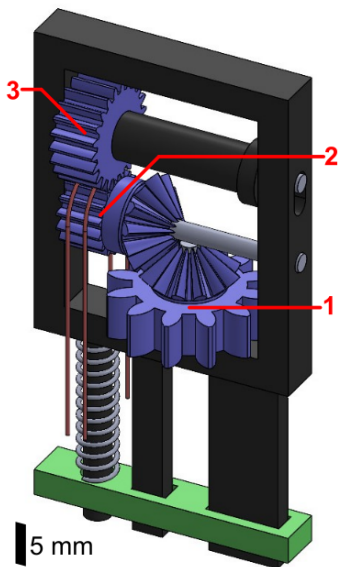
Actuation unit consisting of two bevel-spur gears (1, 2) and one spur gear (3) with tension regulating mechanism.
